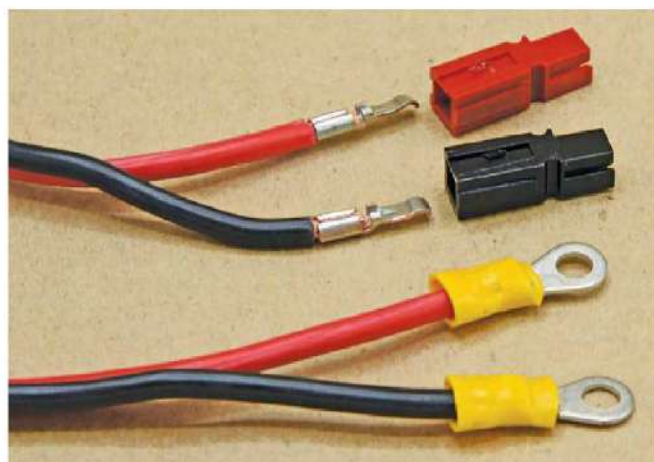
Anderson Powerpole connectors and insulated ring terminals installed on a power cable using the Ultra-Grip 2 tool and dies.
